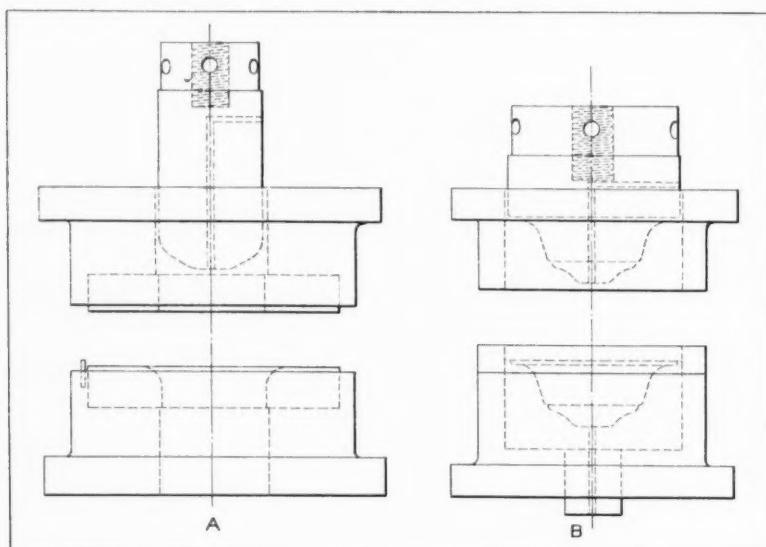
Dies Used in Forming Steel Shells for Lamp Base Shown in Fig. 1
